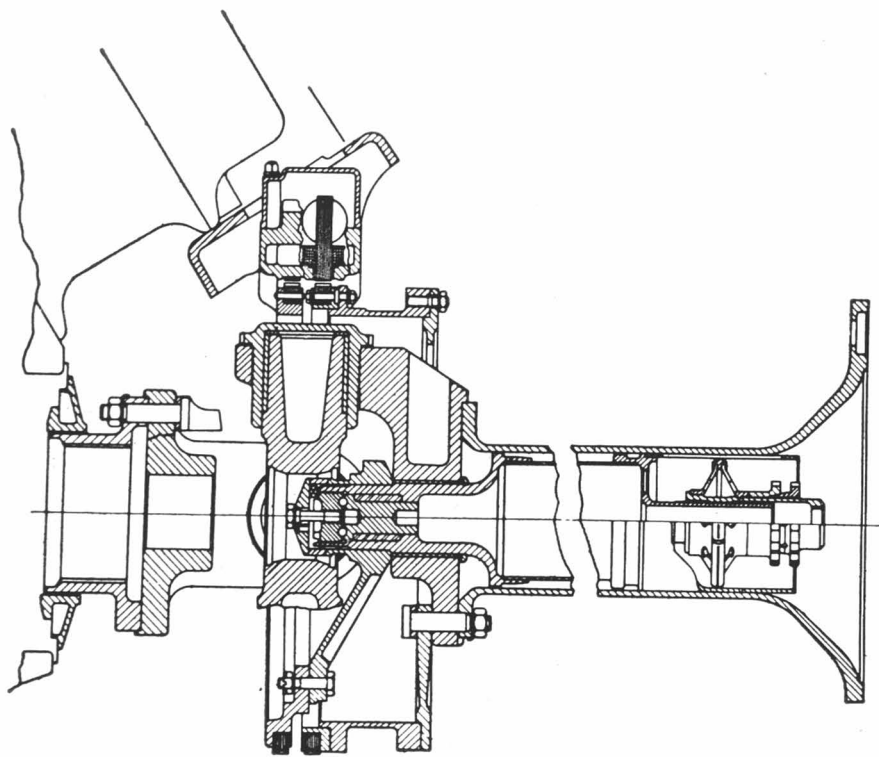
(left).—Arrangement of primary-drive shaft and torque meter
